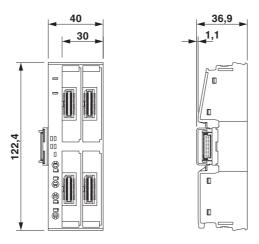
Nominal dimensions of the AXL F BP SE4
